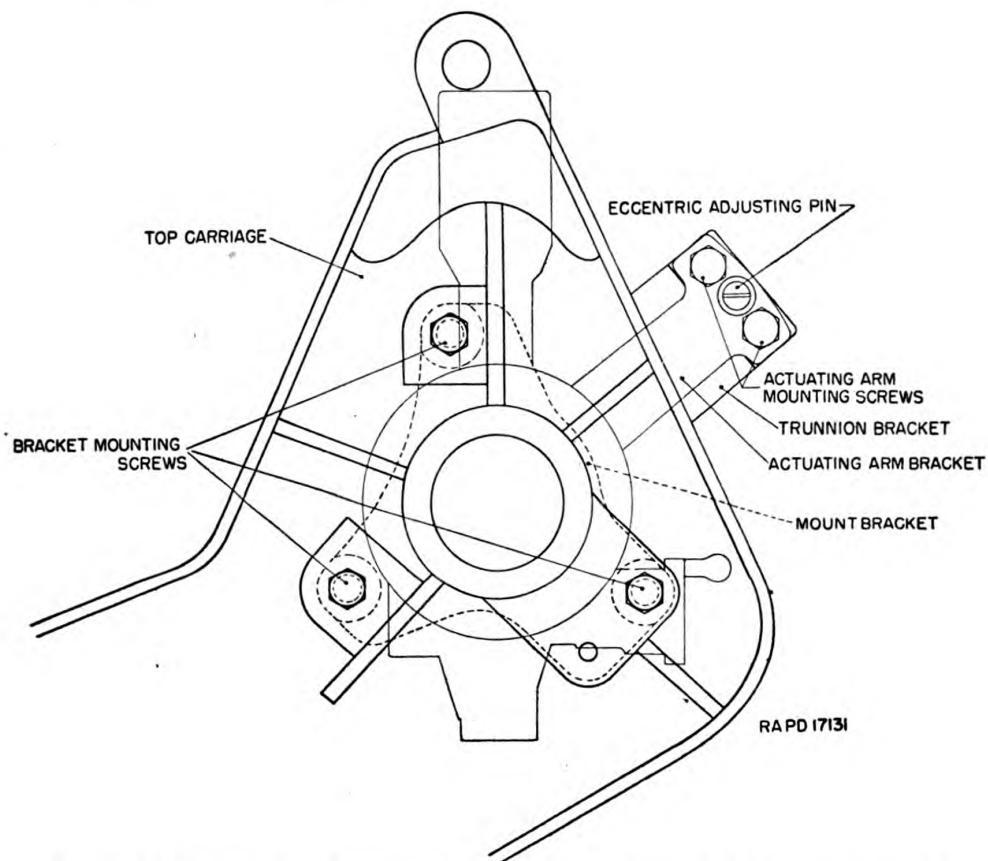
Location of mounting screws in top carriage and trunnion bracket.
